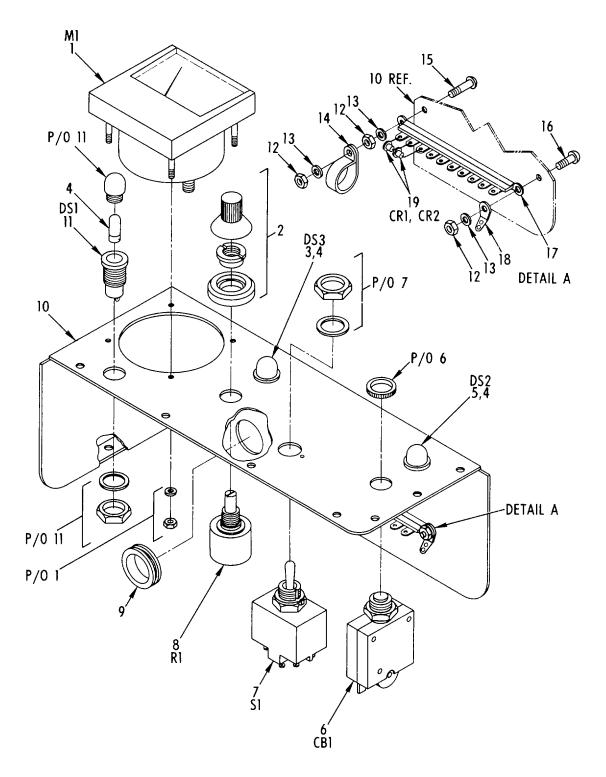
CONTROL PANEL ASSEMBLY.
